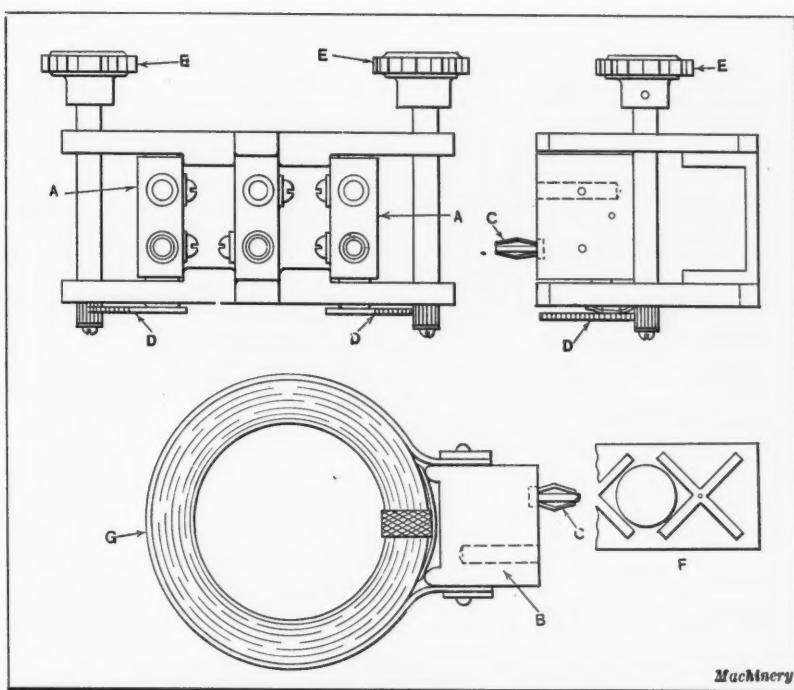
Honeycomb Inductance Coil Mounting, Assembled Coil, and Diagram of Stock from which the Contact Springs are stamped
